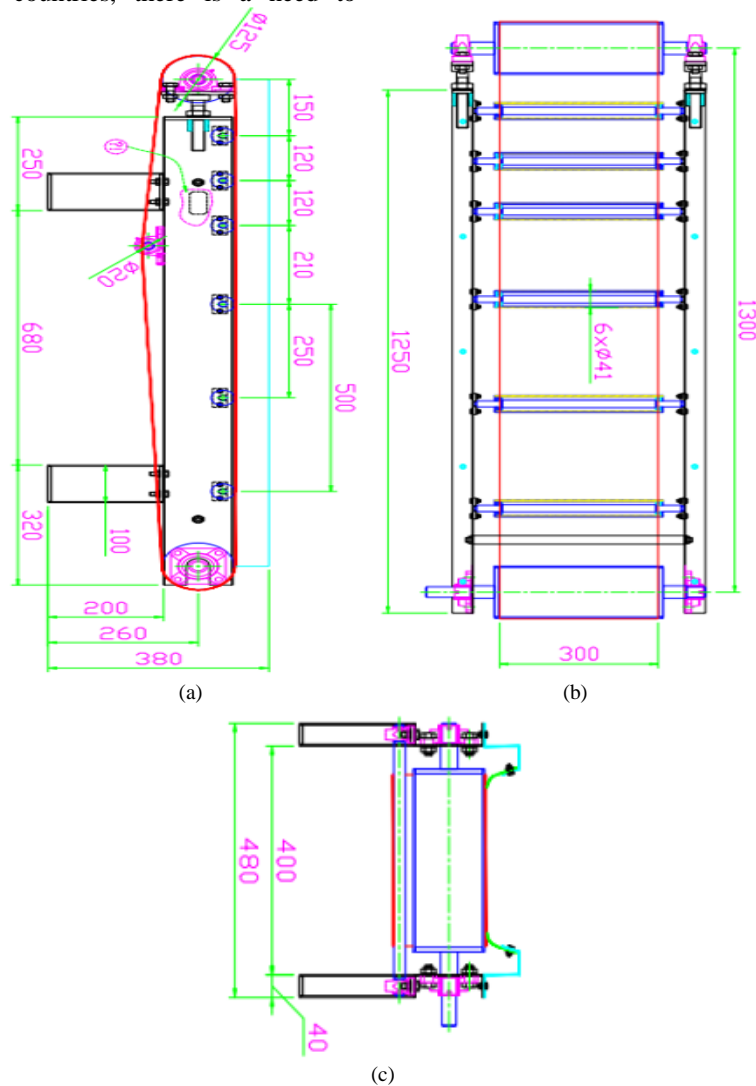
Mechanical Scheme of Conveyor System, (a) Side View, (b) Upper View and (c) Front View.
